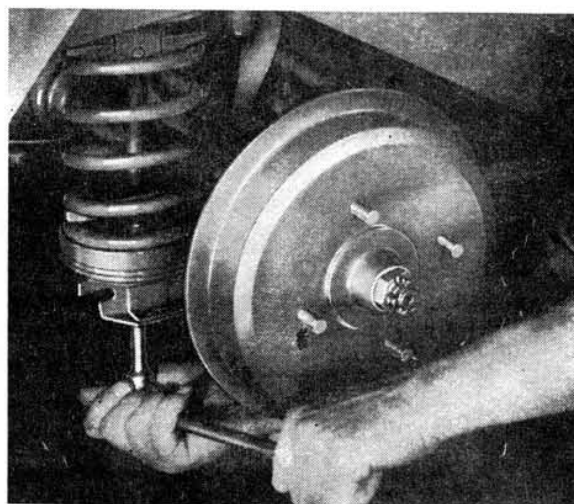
/1 - Removing Road Spring with the Aid of the MP 5-110 Jig (Spring Installer)
